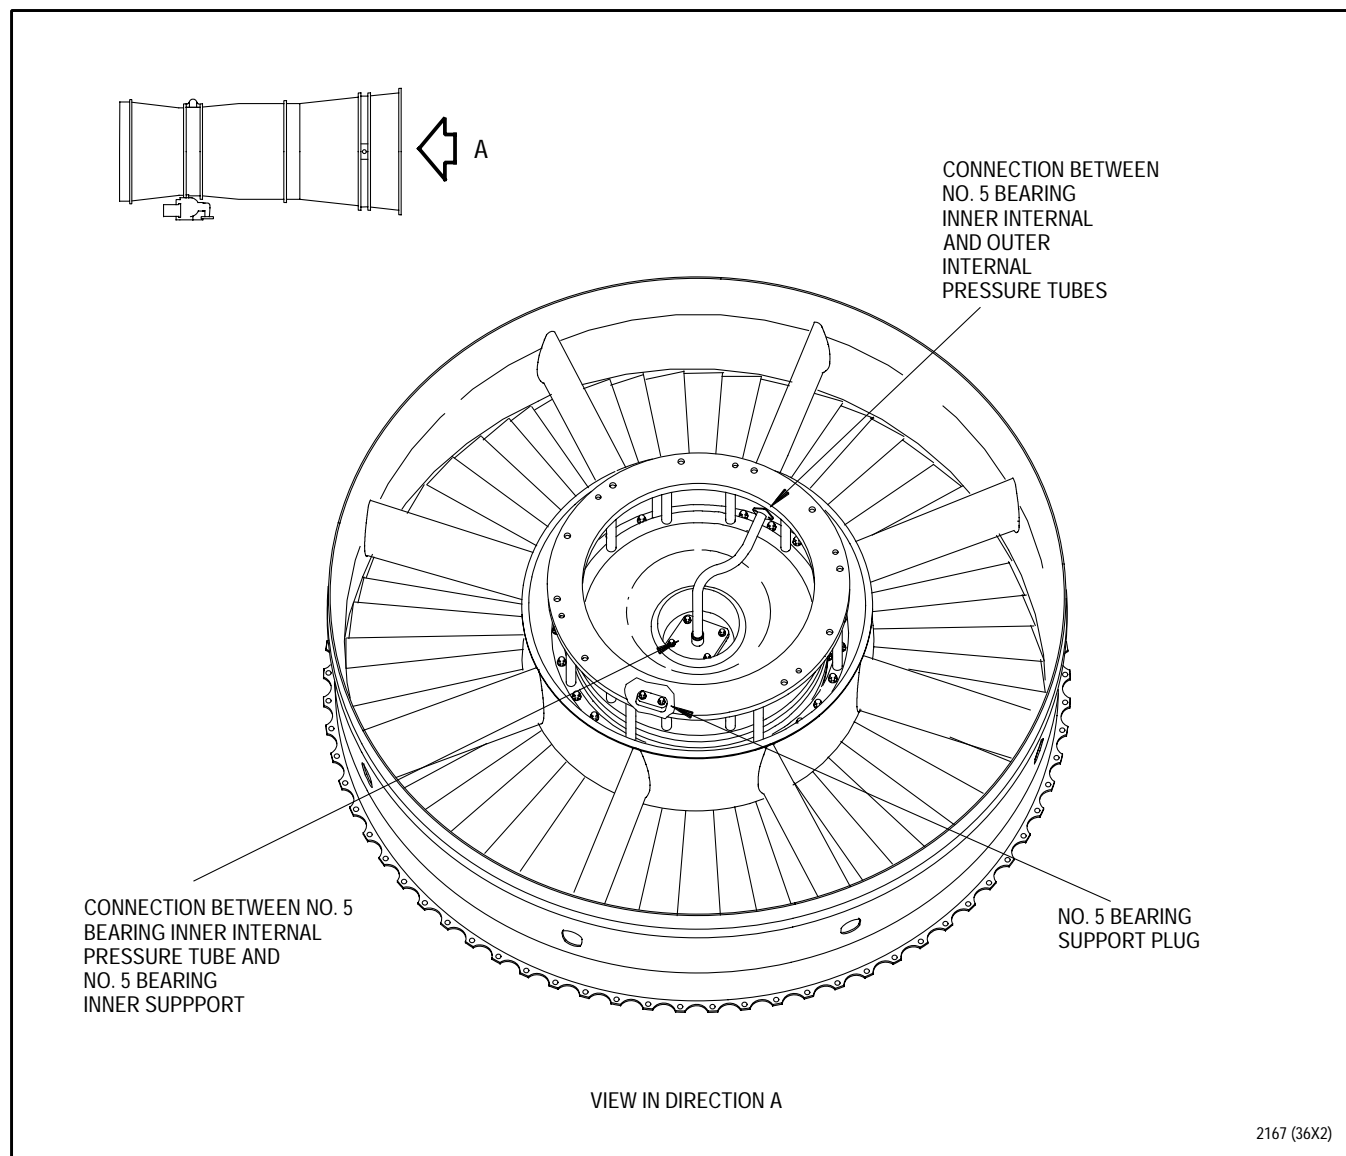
Identification of Areas Required Leak Check During No. 5 Bearing Compartment Airflow Check
